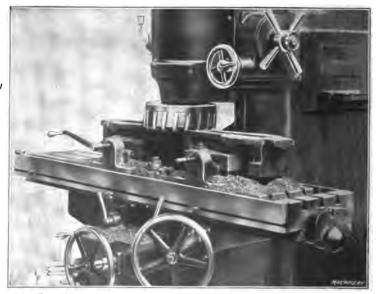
Machine equipped with Two Work-holding Fixtures so that One Casting can be chucked while the Other is being Milled
